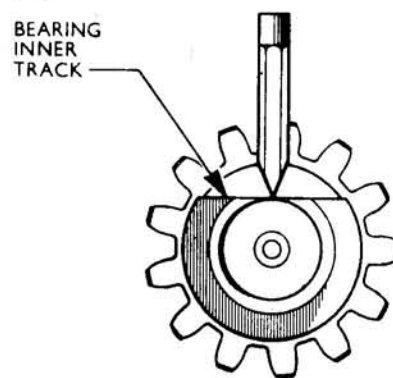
Removing rear bearing from late type shaft (62—Fig. 140); refer to text.
